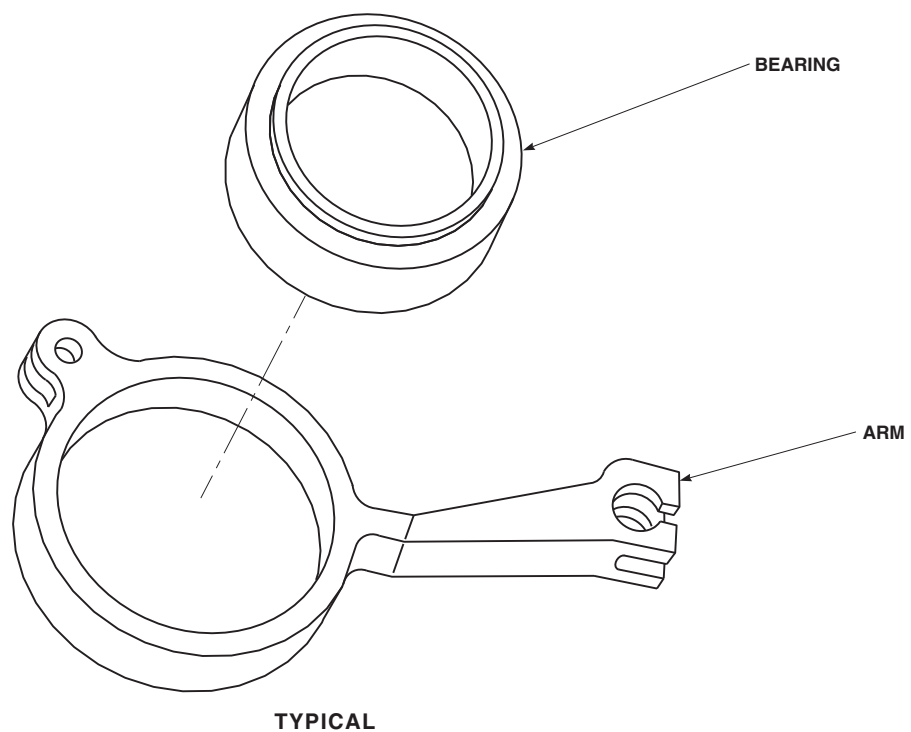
REPLACE TAIL ROTOR QUADRANT UPPER AND LOWER ARM BEARINGS (BENCH)
